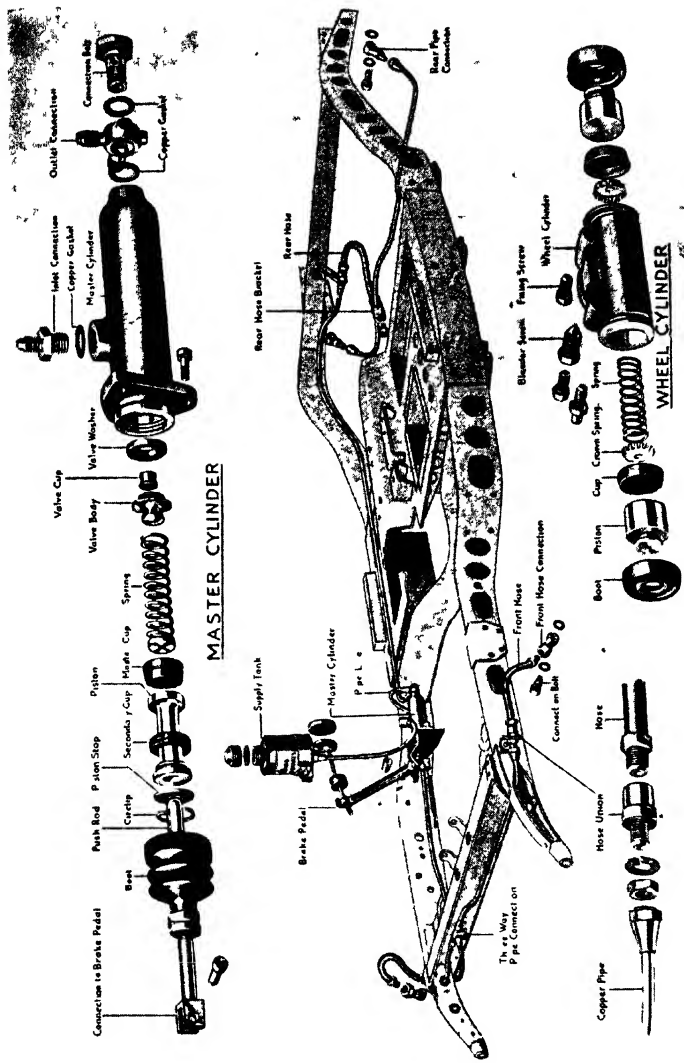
TYPICAL CHASSIS LAY OUT FOR A LOCKHEFFED HYDRAULIC BRAKING SYSTEM WITH THE MASTER CYLINDER PARTS (top) AND THE COMPONENTS OF A WHEEL CYLINDER (bottom) SHOWN IN DETAIL
